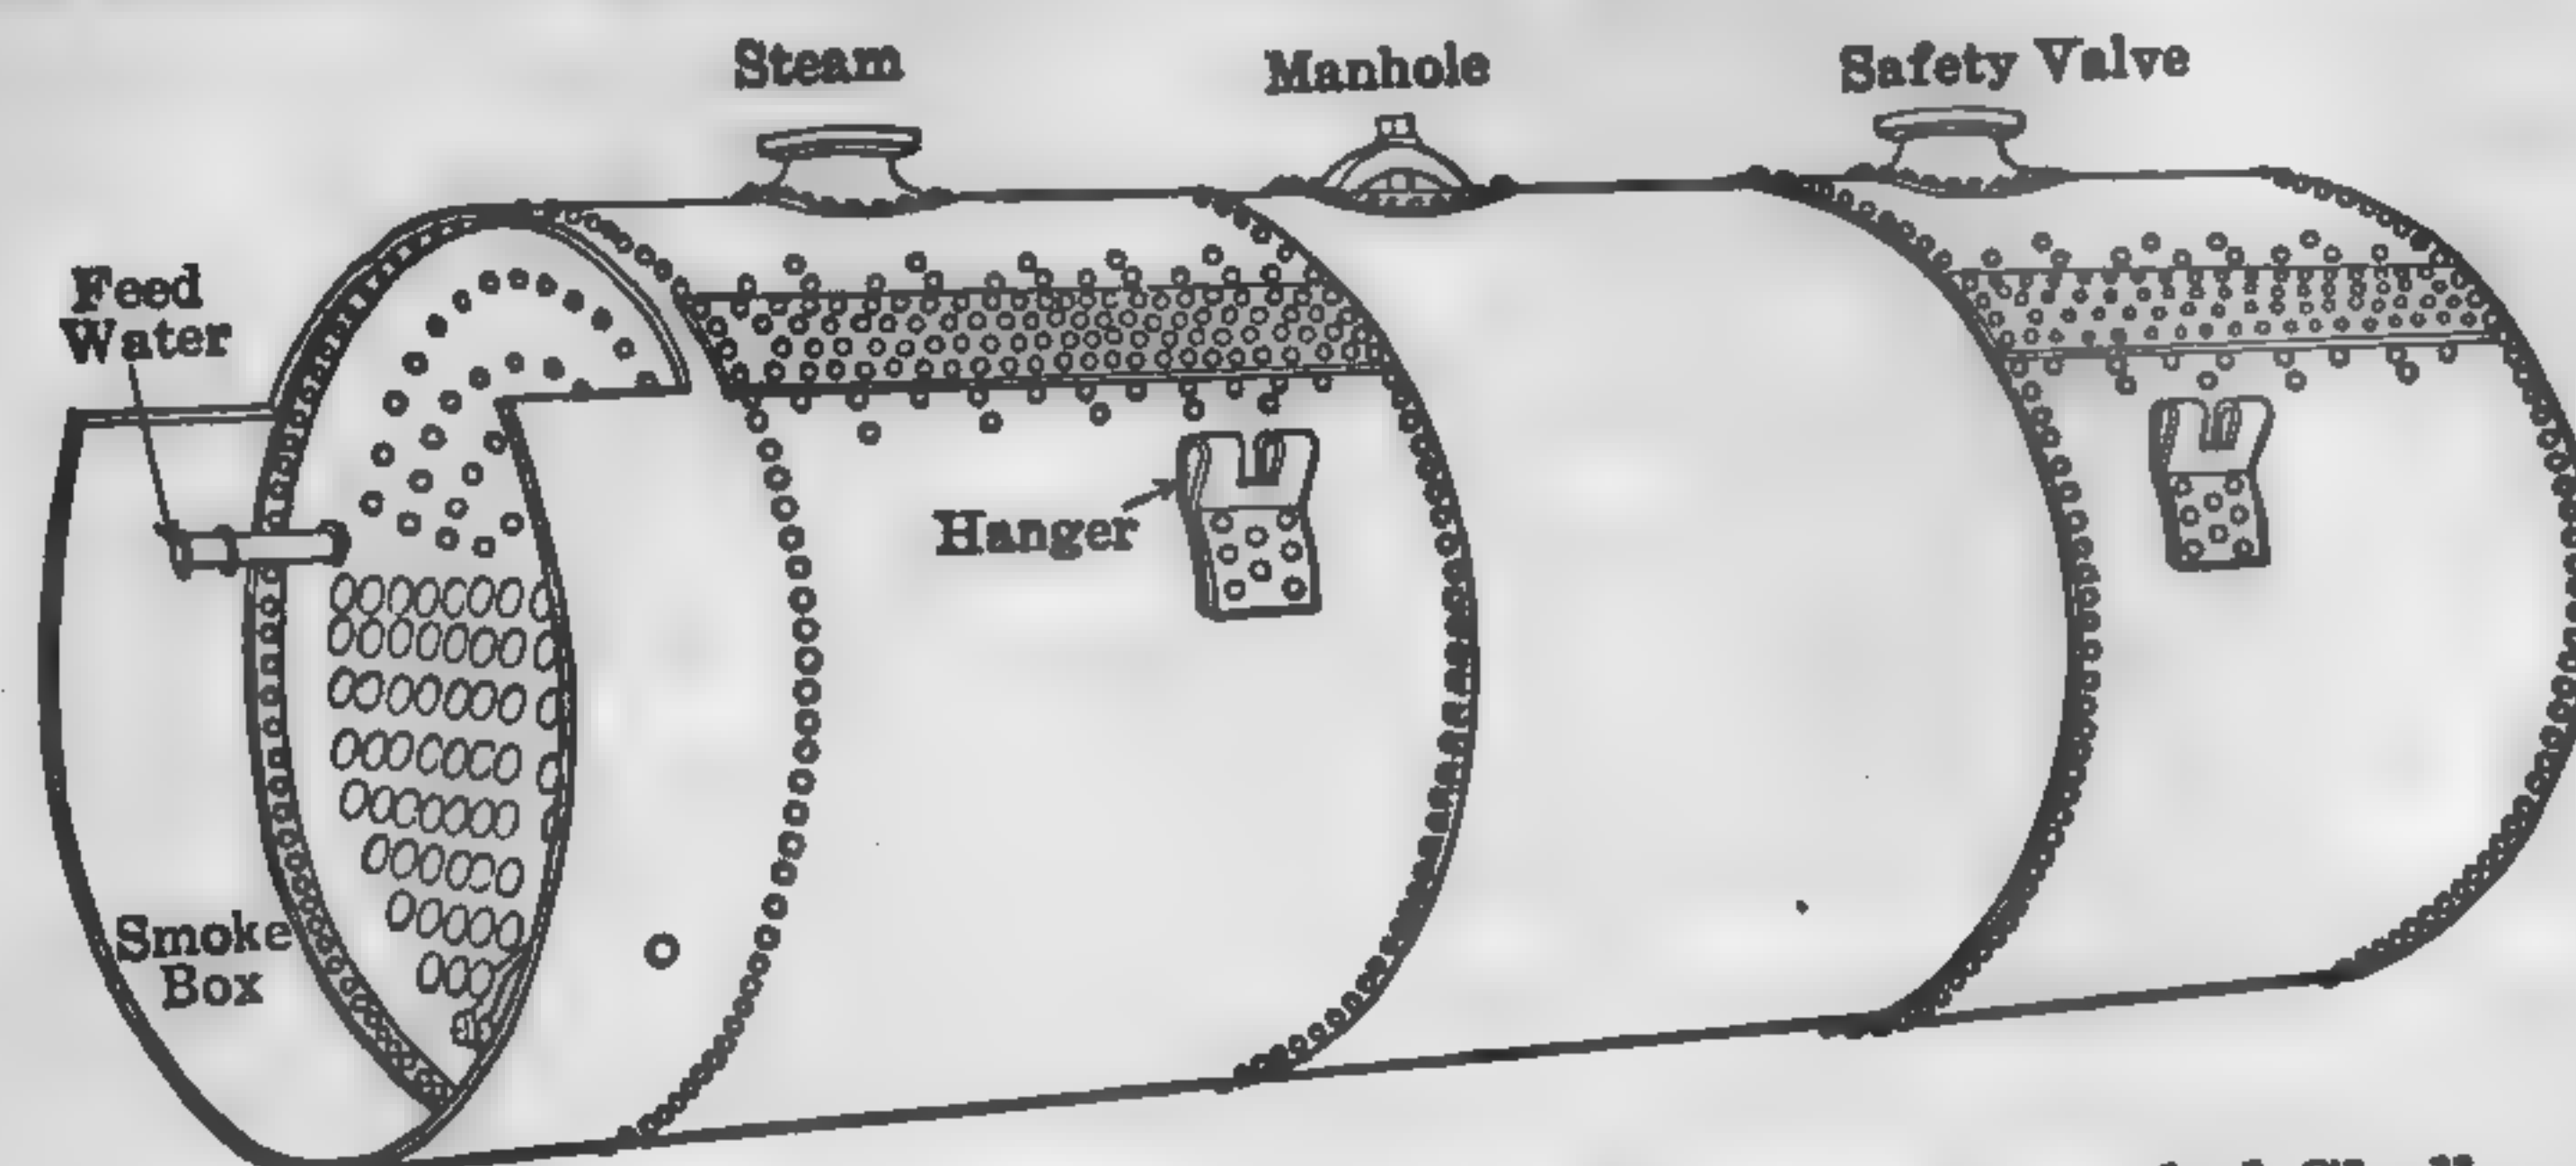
Horizontal Return-tubular Boiler — Extended Shell.
